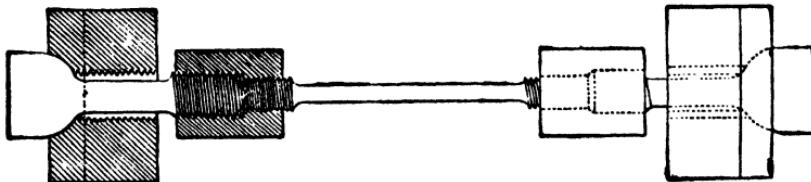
HOLDER FOR SECURING AND ADJUSTING THE TEST-PIECE IN THE MACHINE.
